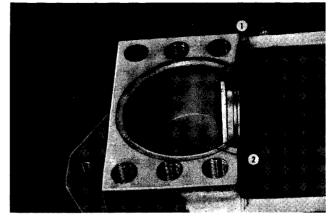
SOCKET AND BUSHING 1. Oil Seal Slot 2. Bushing
